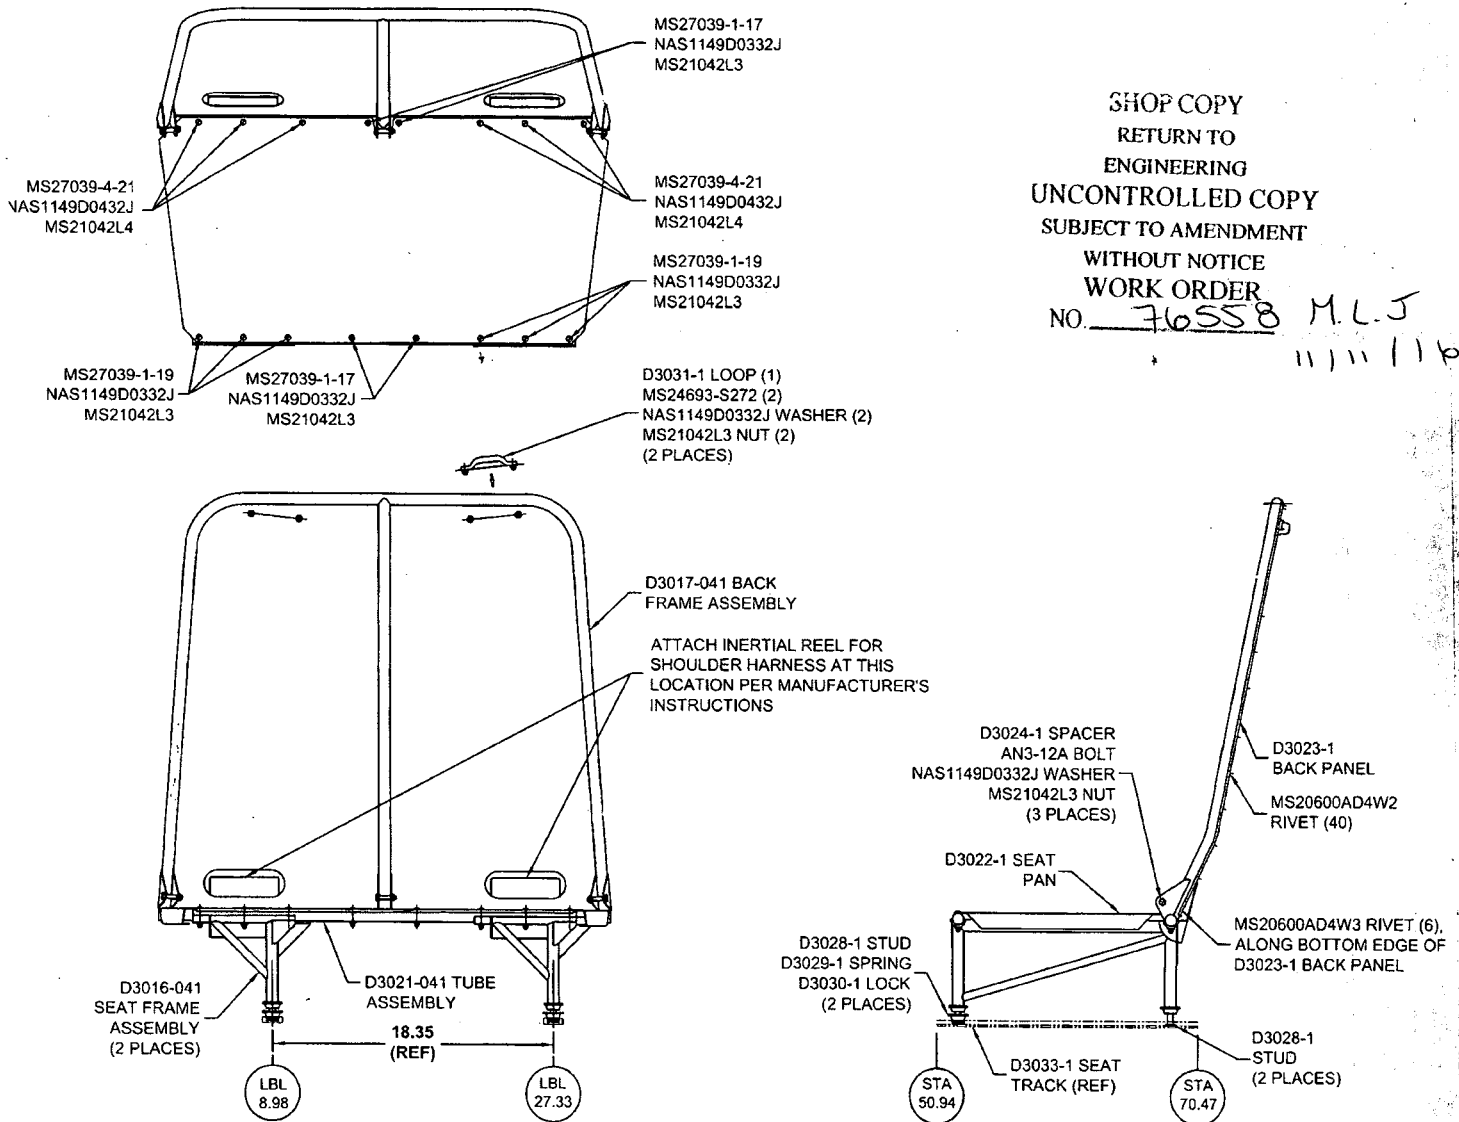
Installation of D350-689-041 Dual High Back Seat Assembly
